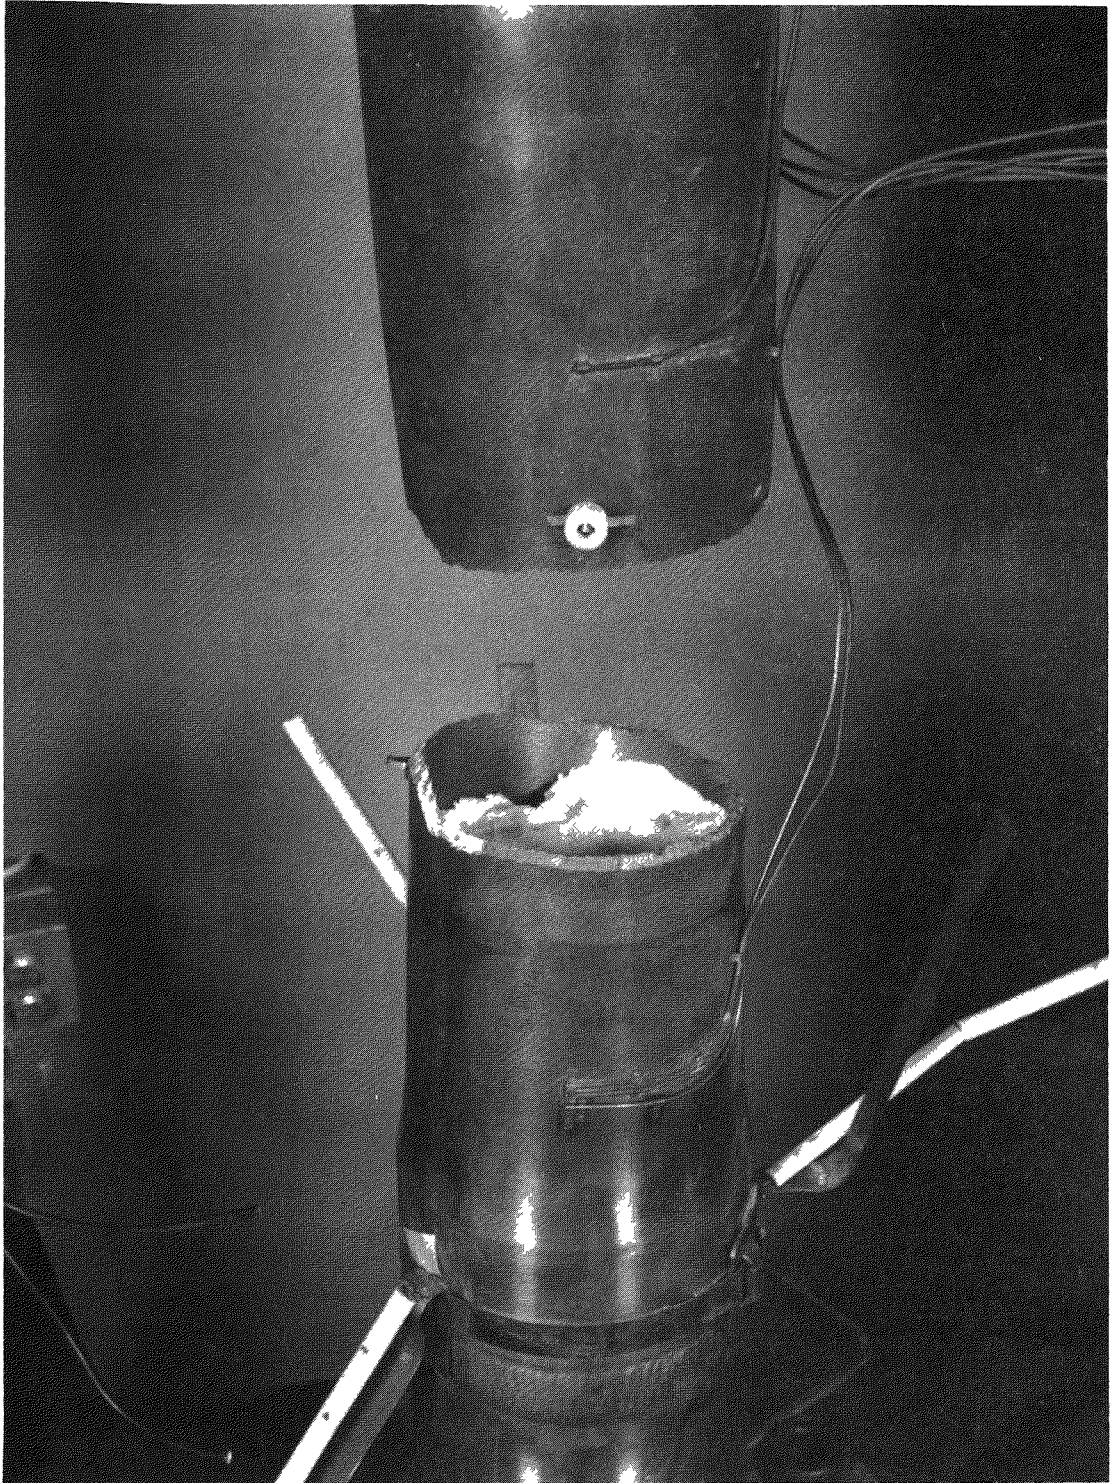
Creep-rupture failure of welded cylinder specimen WCCT-2.
